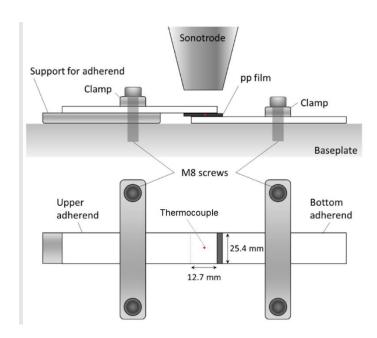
Ultrasonic welding setup for single lap joints. Dimensions are not to scale. Adapted from [19].
